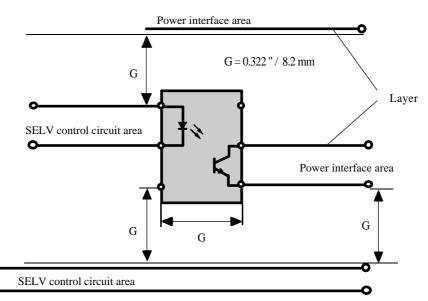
Top view of optocoupler mounting on a board (clearance on PC board: 0.322 "/ 8.2 mm, creepage path on PC board is 0.322 "/ 8.2 mm) Not only the solder eyes of the coupler itself on the board must have the 8-mm distance, but also all layers located between the SELV areas and the power interface areas.
